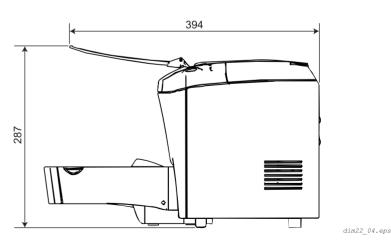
Right Side View of EPL-5900 with Paper Eject Tray Attachment Installed
